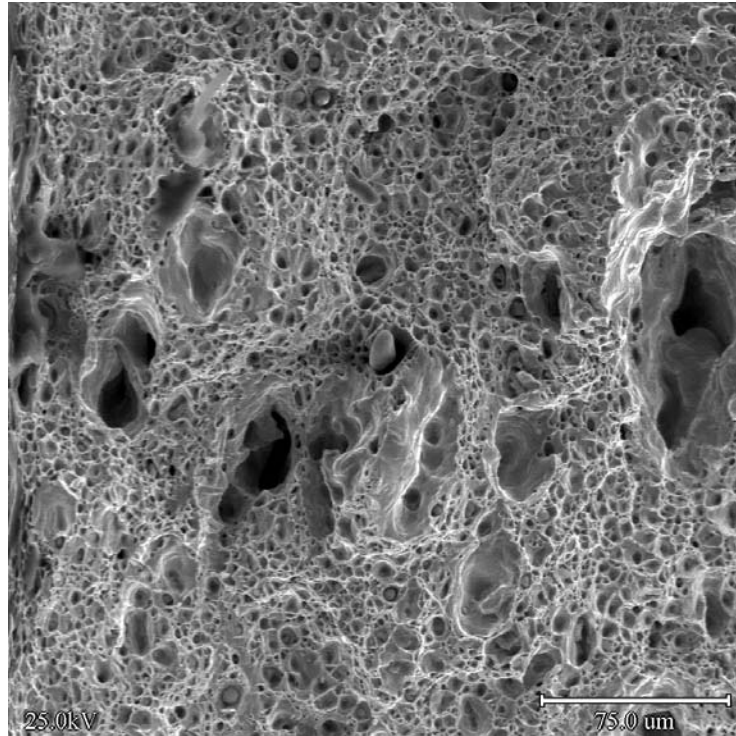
Fracture surface of as-reduced Super Invar alloy after uniaxial testing showing the dimpled nature of the ductile fracture. Second phase particles and large pores from extrusion defects are also present.
